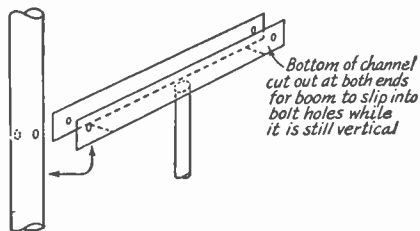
The mounting plate is made from a length of "U"-channel iron cut and drilled as shown. The boom is raised vertically until one set of bolt holes is in line and a bolt is slipped through. The boom is then swung into its horizontal position and the other bolt is put in place.
